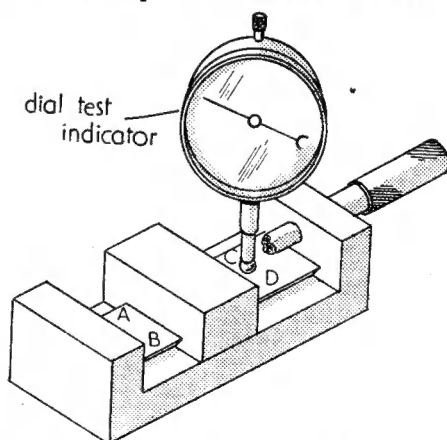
Testing the work surface of a machine vice for parallelism with the base
